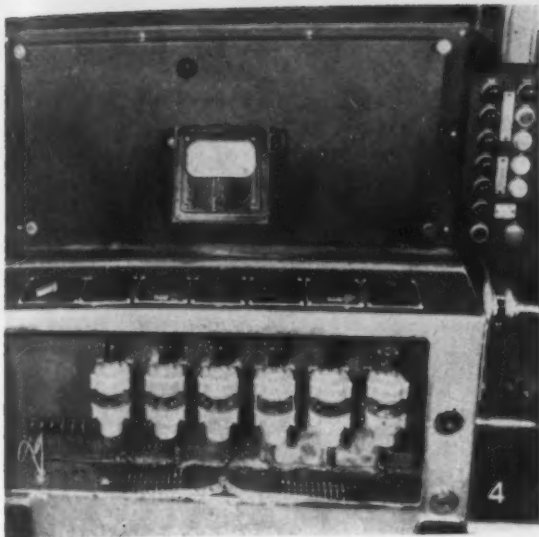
"... the rotor of a selsyn transmitter ... sends a signal to a corresponding drill spindle."
